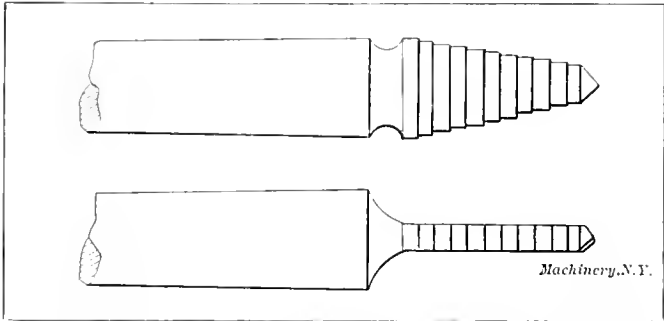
Combined Drill and Reamer after the Turning and Milling Operations
